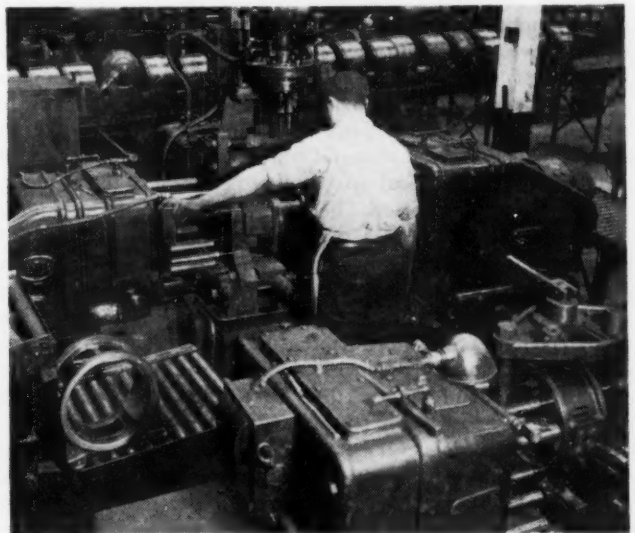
HANDLING FACILITIES ARRANGED FOR THE USE OF MACHINE OPERATOR
